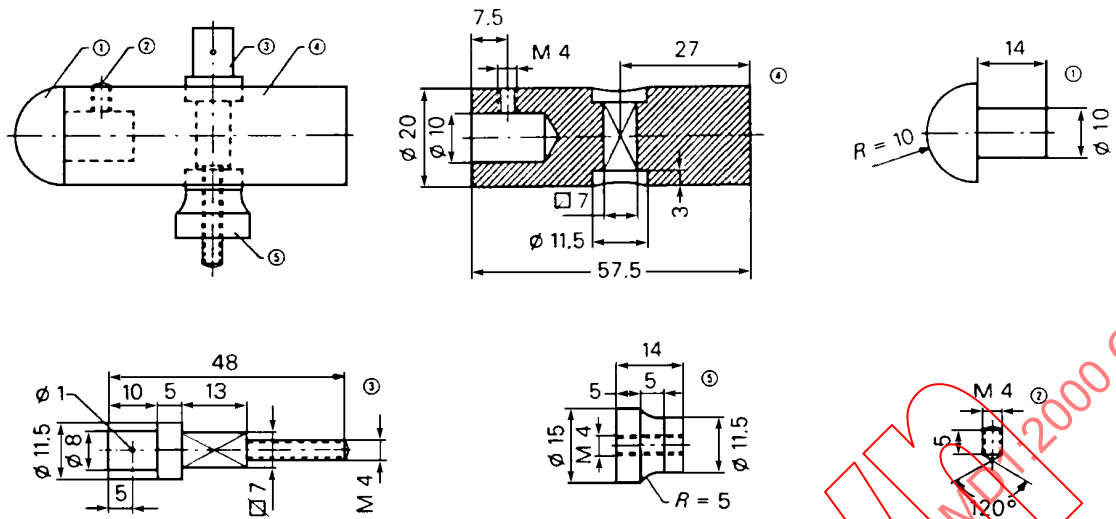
Test equipment for flexion test (see 9.2.4.3)
